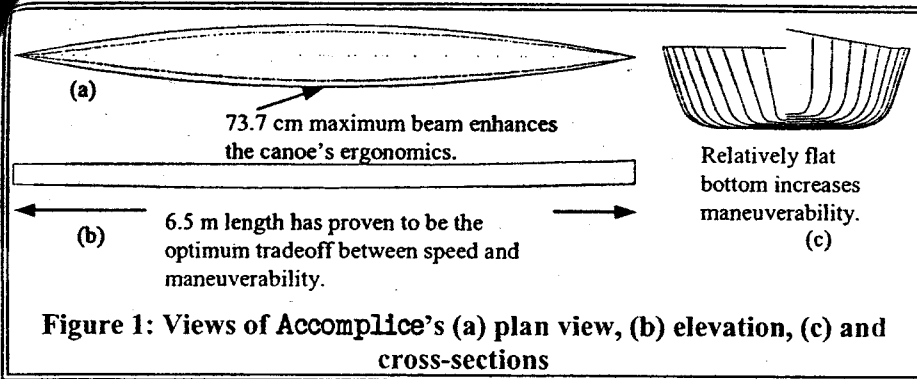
Views of Accomplice's (a) plan view, (b) elevation, (c) and cross-sections
